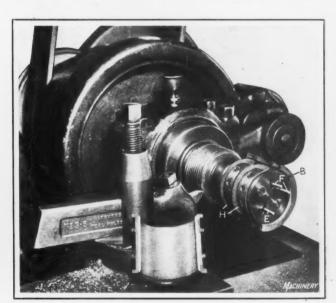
Connecting-rod Bearing Chuck shown in Fig. 2
